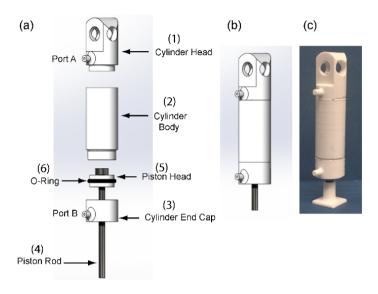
An Overview of the 3D printed actuator: (a) an exploded view, (b) assembled view, and (c) 3d printed and assembled [5].
